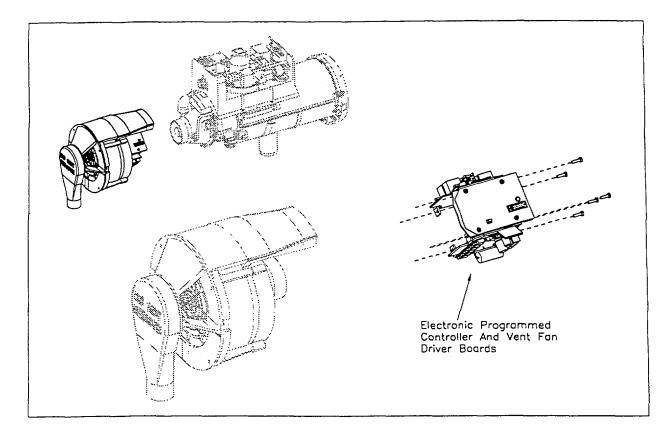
Detail, Vent Fan Impeller Assembly
